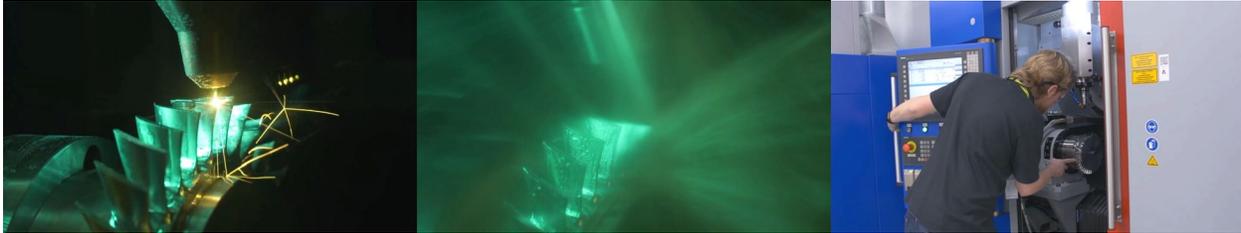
Robot Welding Mold to Repair Surface
